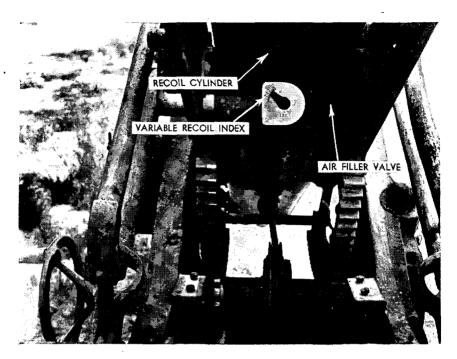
Front end of cradle of Model 88 75-mm antiaircraft gun.
